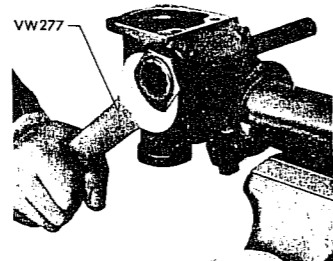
Releasing the locknut on the worm spindle axial play adjustment screw.
